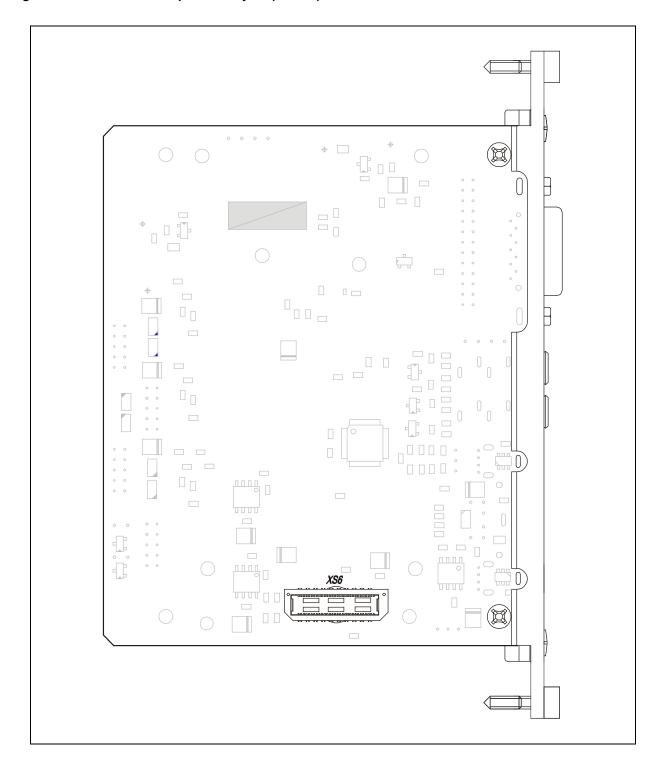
MIC584-02 Components Layout and Dimensions (Top)
